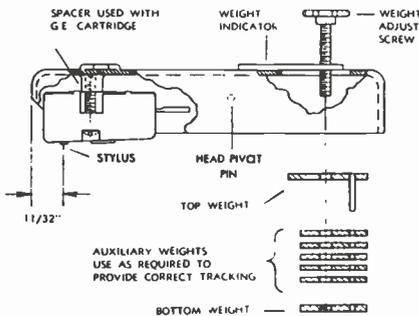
Sectional drawing of the head on the Metzner arm. Weights may be removed to accommodate even the lightest cartridges.
